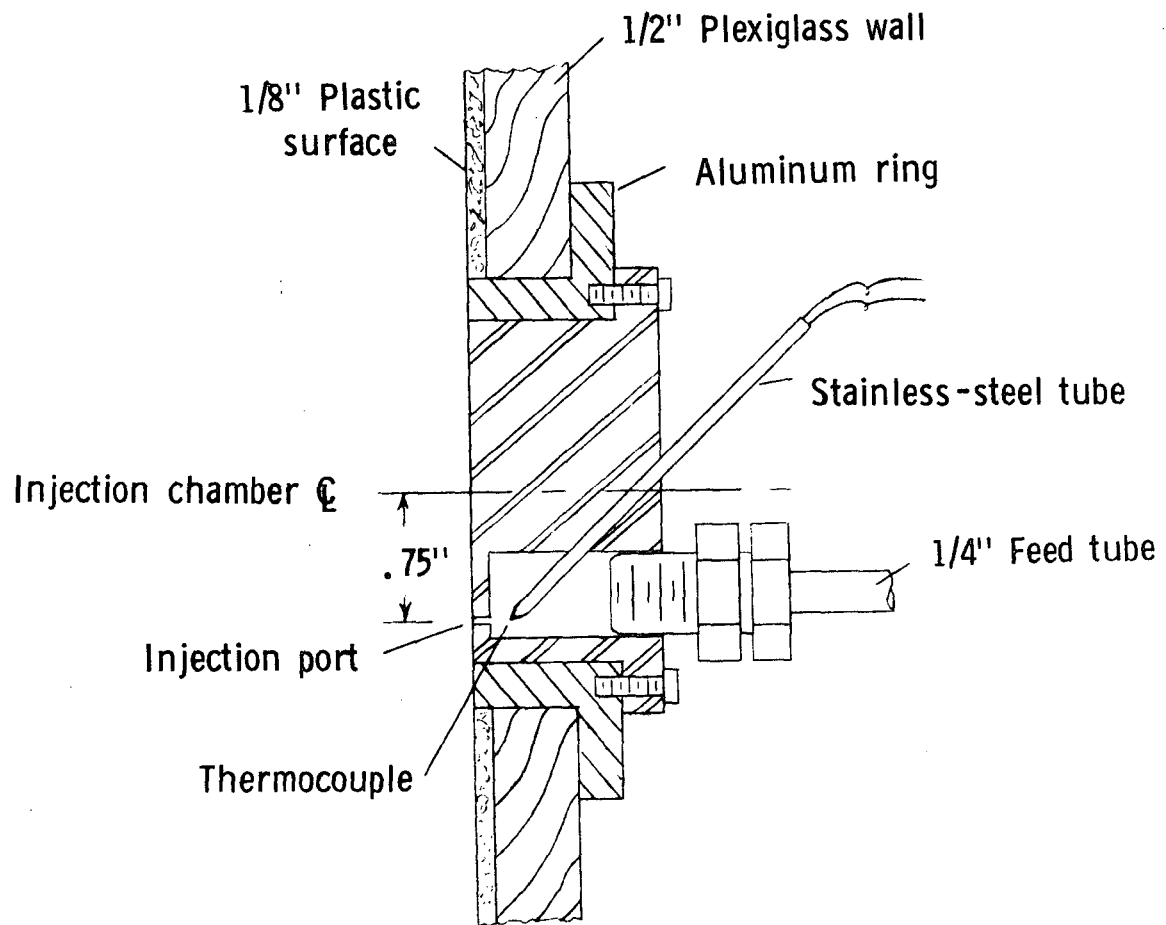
Details of wall injection chamber used for lateral injection tests.
